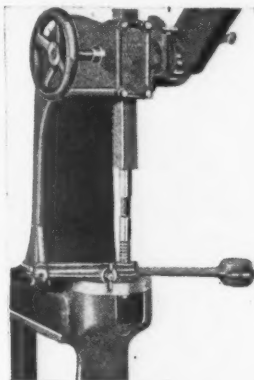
The bushing in rod is broached by using a clamp over small end rod as shown
